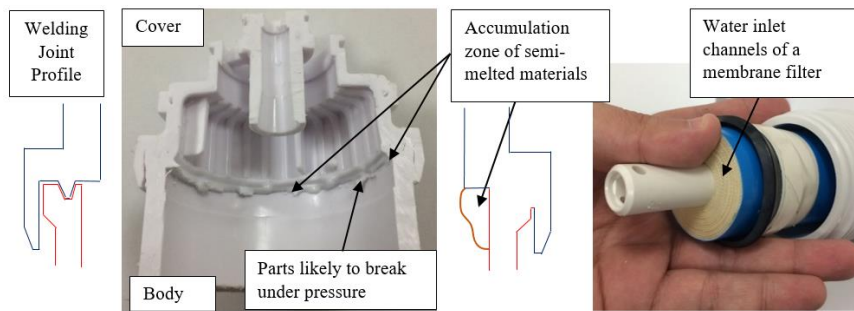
Inline filter welding structure, accumulations in the inner and outer parts.
